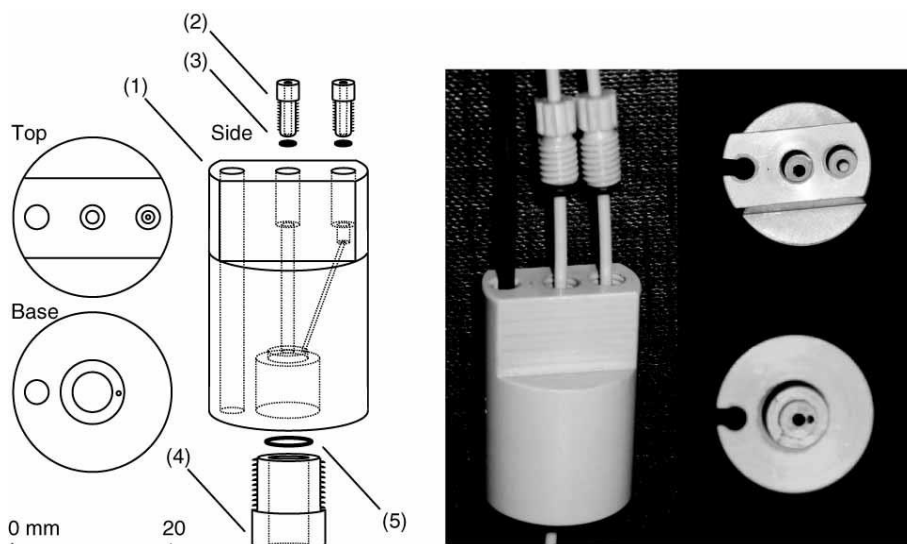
Scale drawing (left) and photographs (right) of the flowcell headpiece assembly. (1) headpiece; (2) inlet and outlet pipe bushes; (3) and (5) O-rings; (4) NMR tube retaining bush. The left part of the composite photograph shows the inlet and outlet pipes and their respective bushes and O-rings, together with the liquid sensor cable, the latter and the inlet pipe running continuously through the headpiece. The top right shows the top view, and the bottom right the bottom view, of the headpiece. Adapted with permission from Khajeh et al¹¹⁶ Copyright © 2010 John Wiley & Sons, Ltd.
